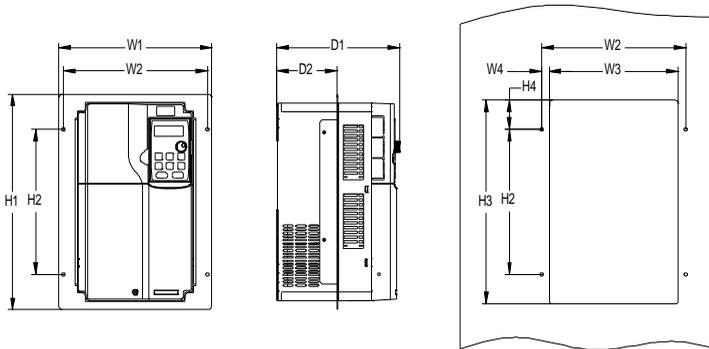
Flange mounting for 380V 30–90kW VFD models
